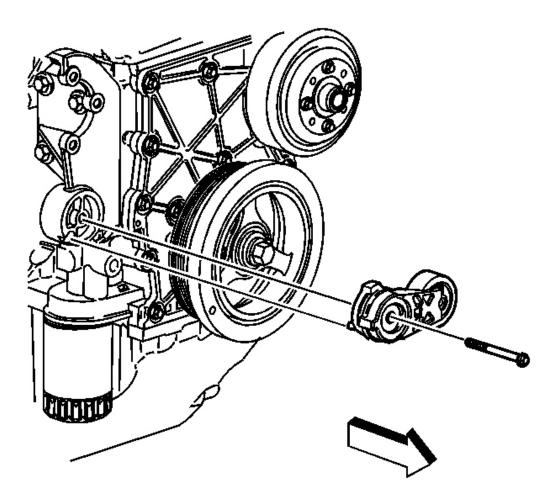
View Of Drive Belt Tensioner & Bolt Courtesy of GENERAL MOTORS CORP.
